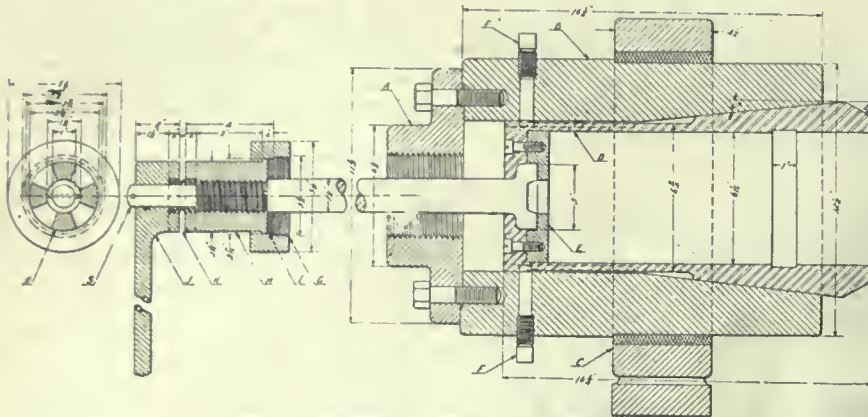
ASSEMBLY OF COLLET CHUCK.
